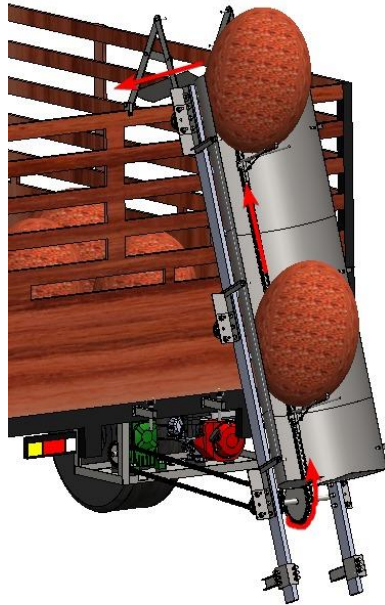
Lifting Mechanism of the Palm Fruit Lifting Device
